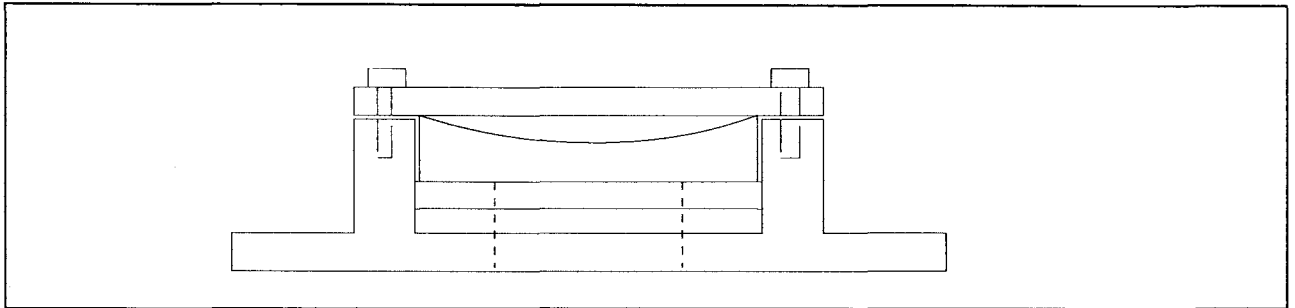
aluminium holder including piezo element and insulating layer behind the mirror
